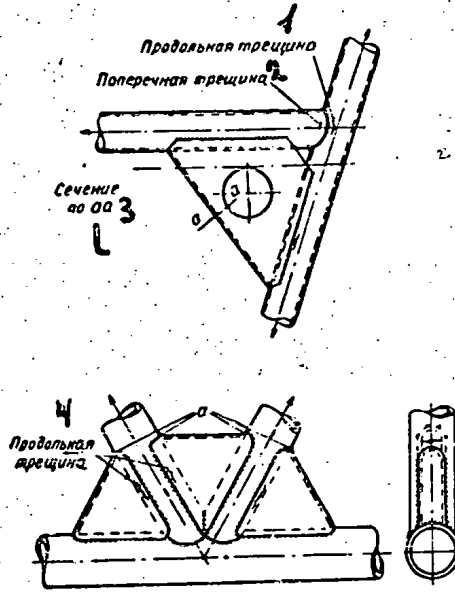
Location of cracks in welded sub-assemblies
